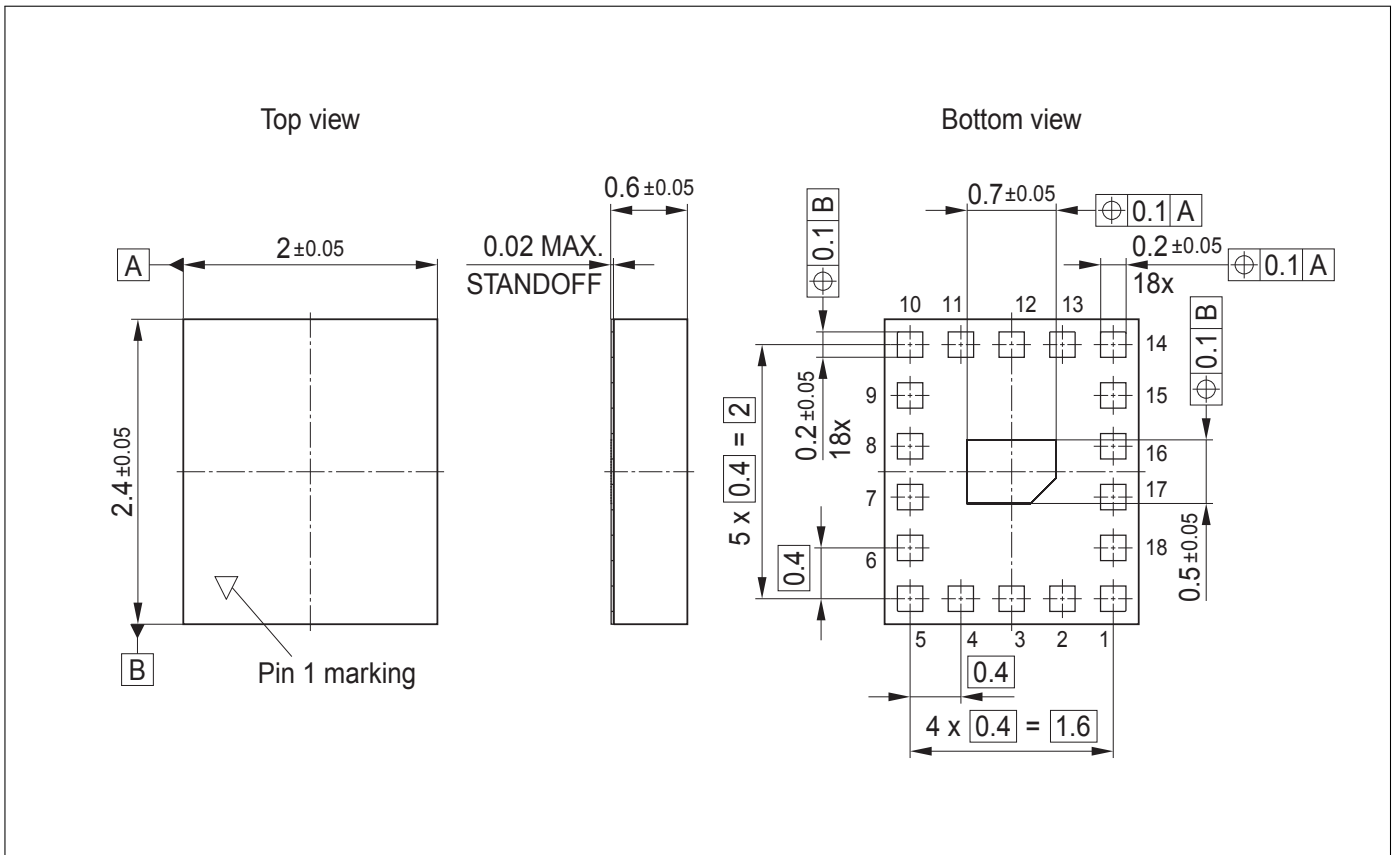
ATSLP-18-3 Package Outline (top, side and bottom views)
